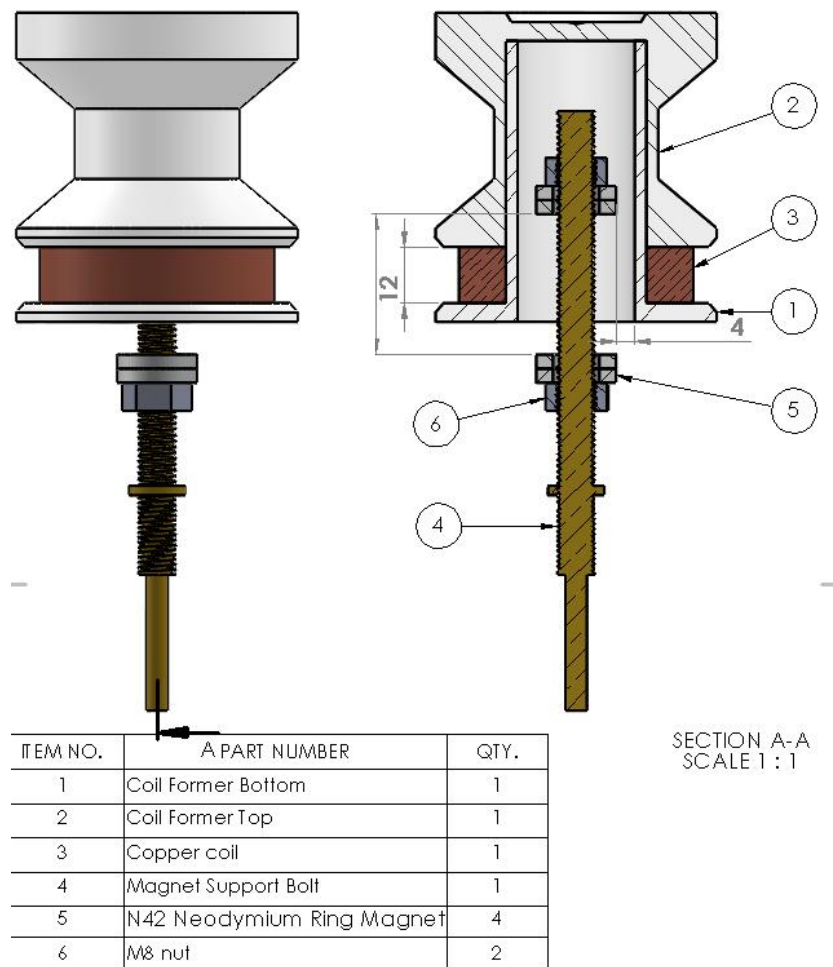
CAD model of the coil and magnetic circuit assembly.
